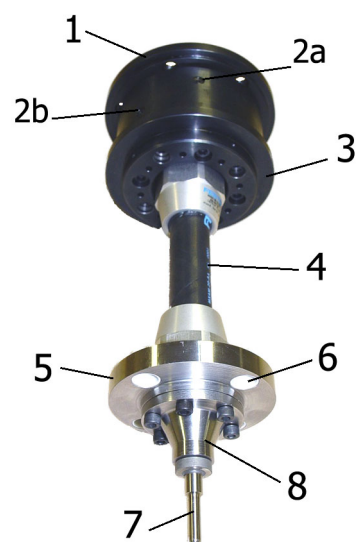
Assembly of the rotary joint, Fluidic Muscle actuator and the pin.
